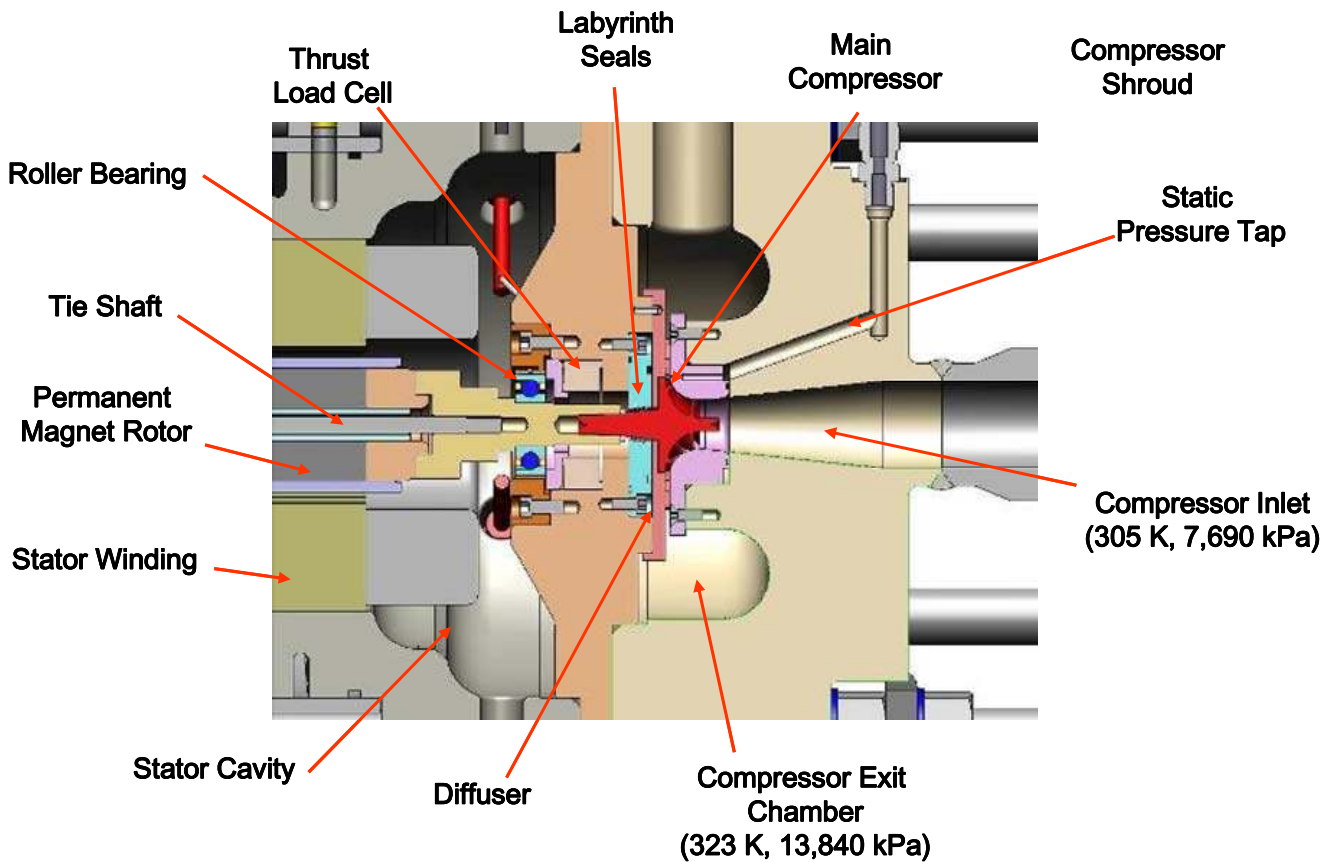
Detail of main compressor, labyrinth seals, ball bearings, and location of other major components.
